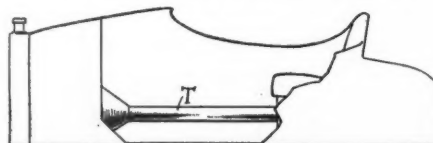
CORNELIAN SHAFT HOUSING THROUGH CENTER OF CAR
